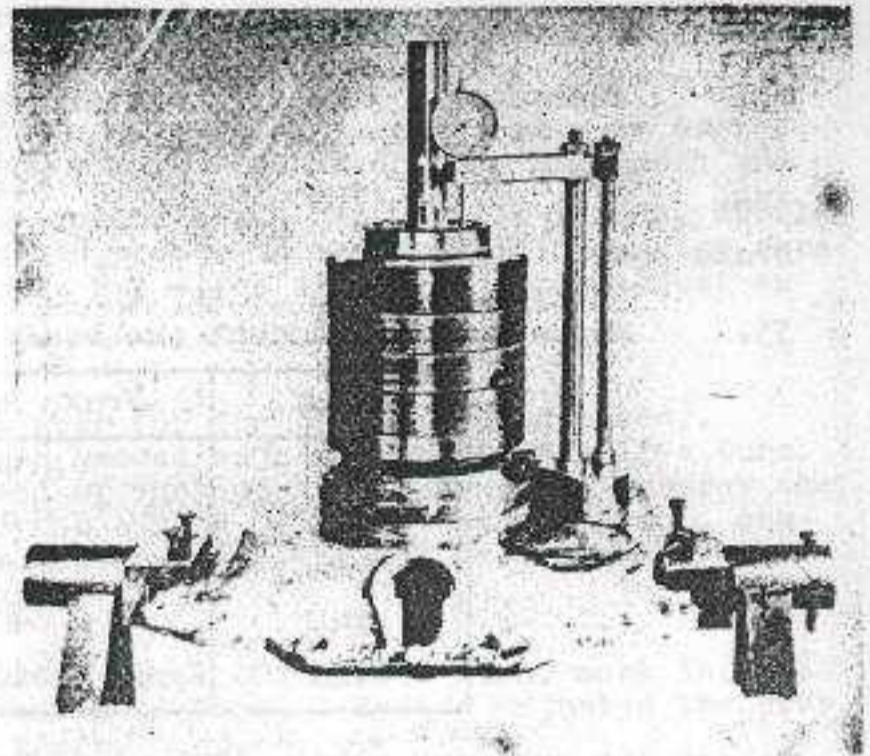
GEARBOX - CHECKING THE NECESSARY CLEARANCE, RUNNING GEAR TO GEARCASE (SEE FIG 14)
